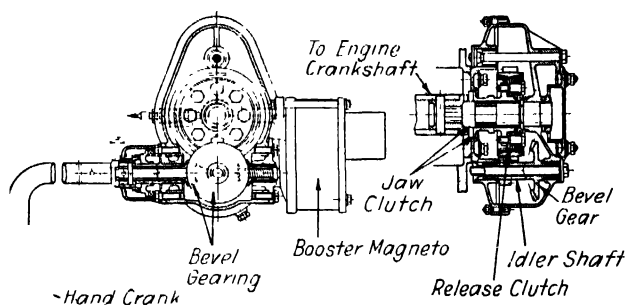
Sectional Views of BMW Hand Starter Gear Showing Construction of Devices of this Character.
